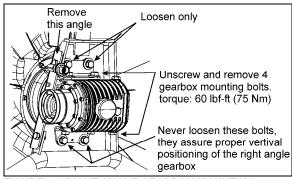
RIGHT ANGLE GEARBOX MOUNTING 05126
